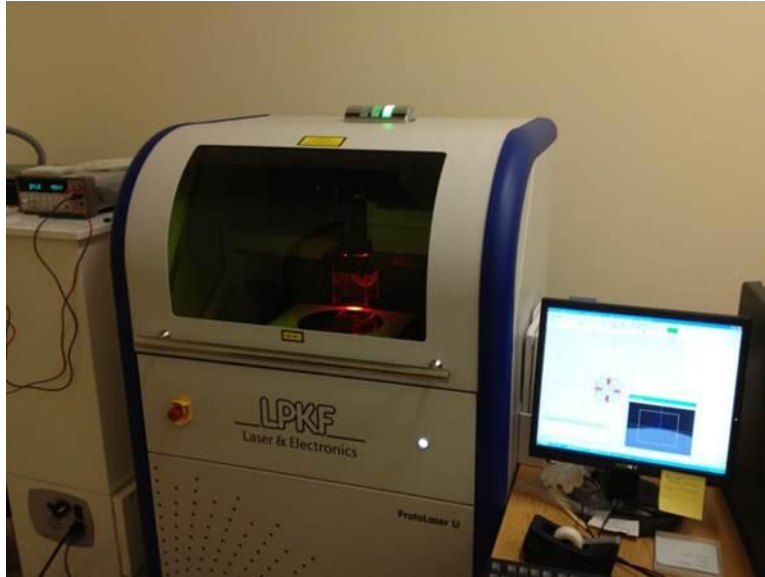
Photo of UV laser for micromachining of Si and PCB. Photo taken by Serhan Ardanuç
